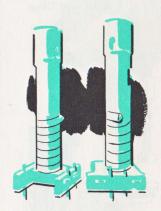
Method of cutting interior thread for large diameter wooden screw.
